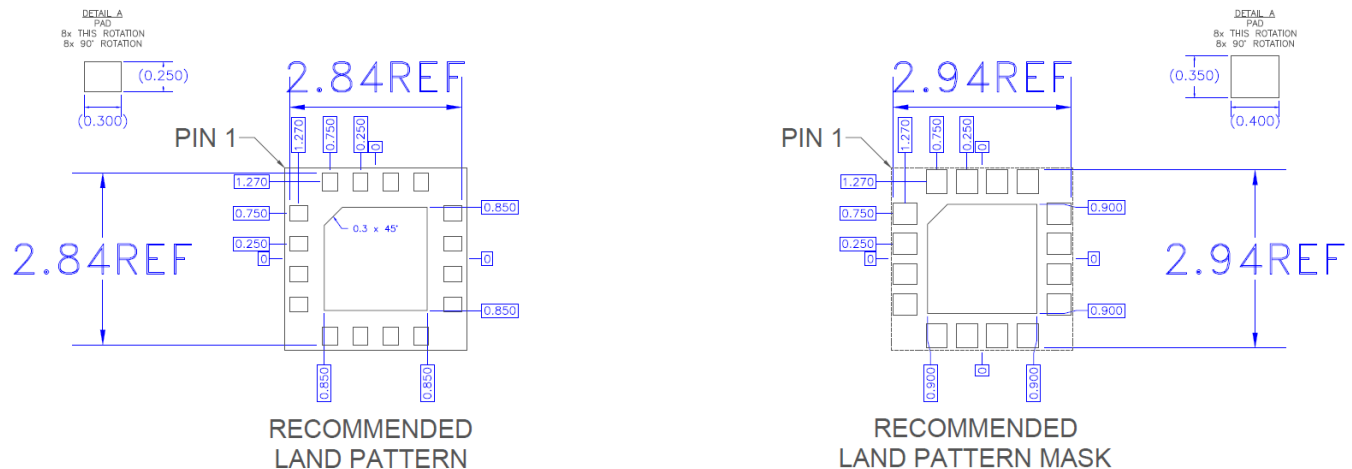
PCB Footprint Recommended Solder Mask Pattern.
